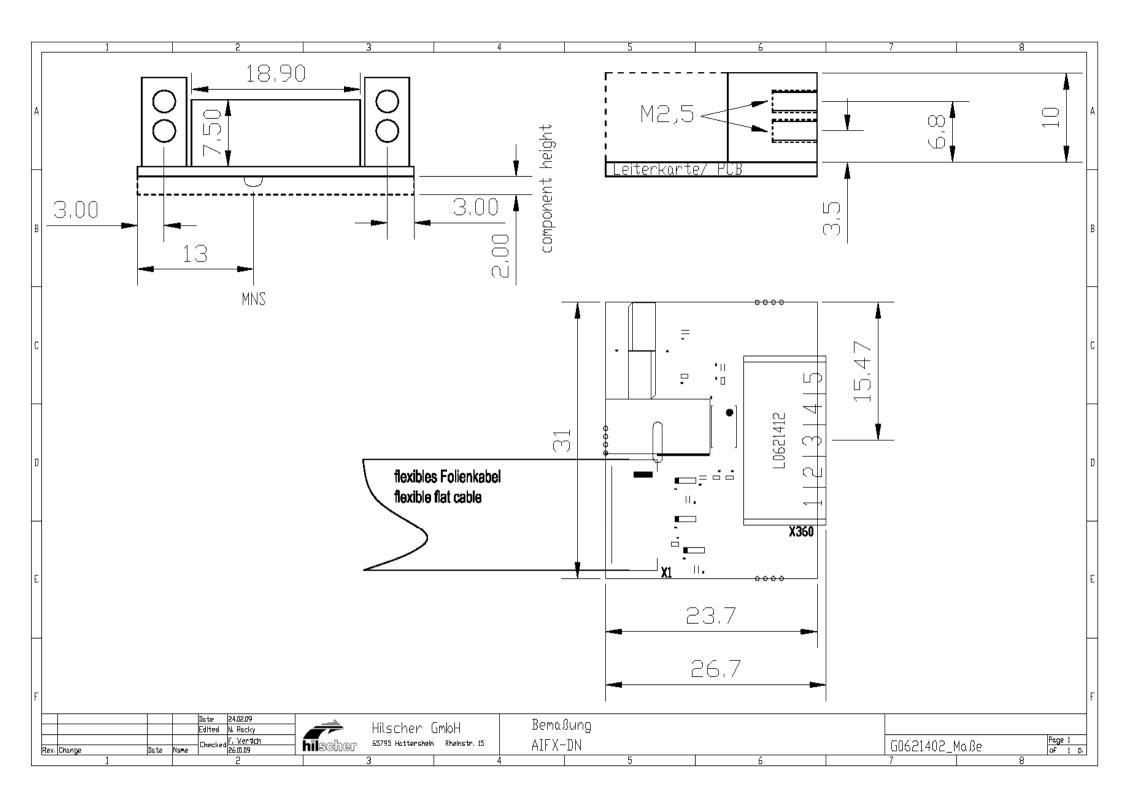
Device Drawing Assembly interface AIFX-DN (back side)
